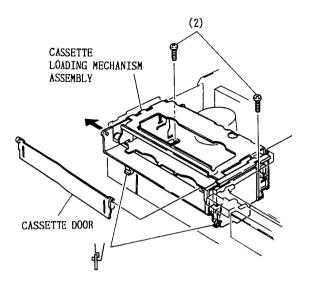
Cassette Loading Mechanism Assembly and Cassette Door
